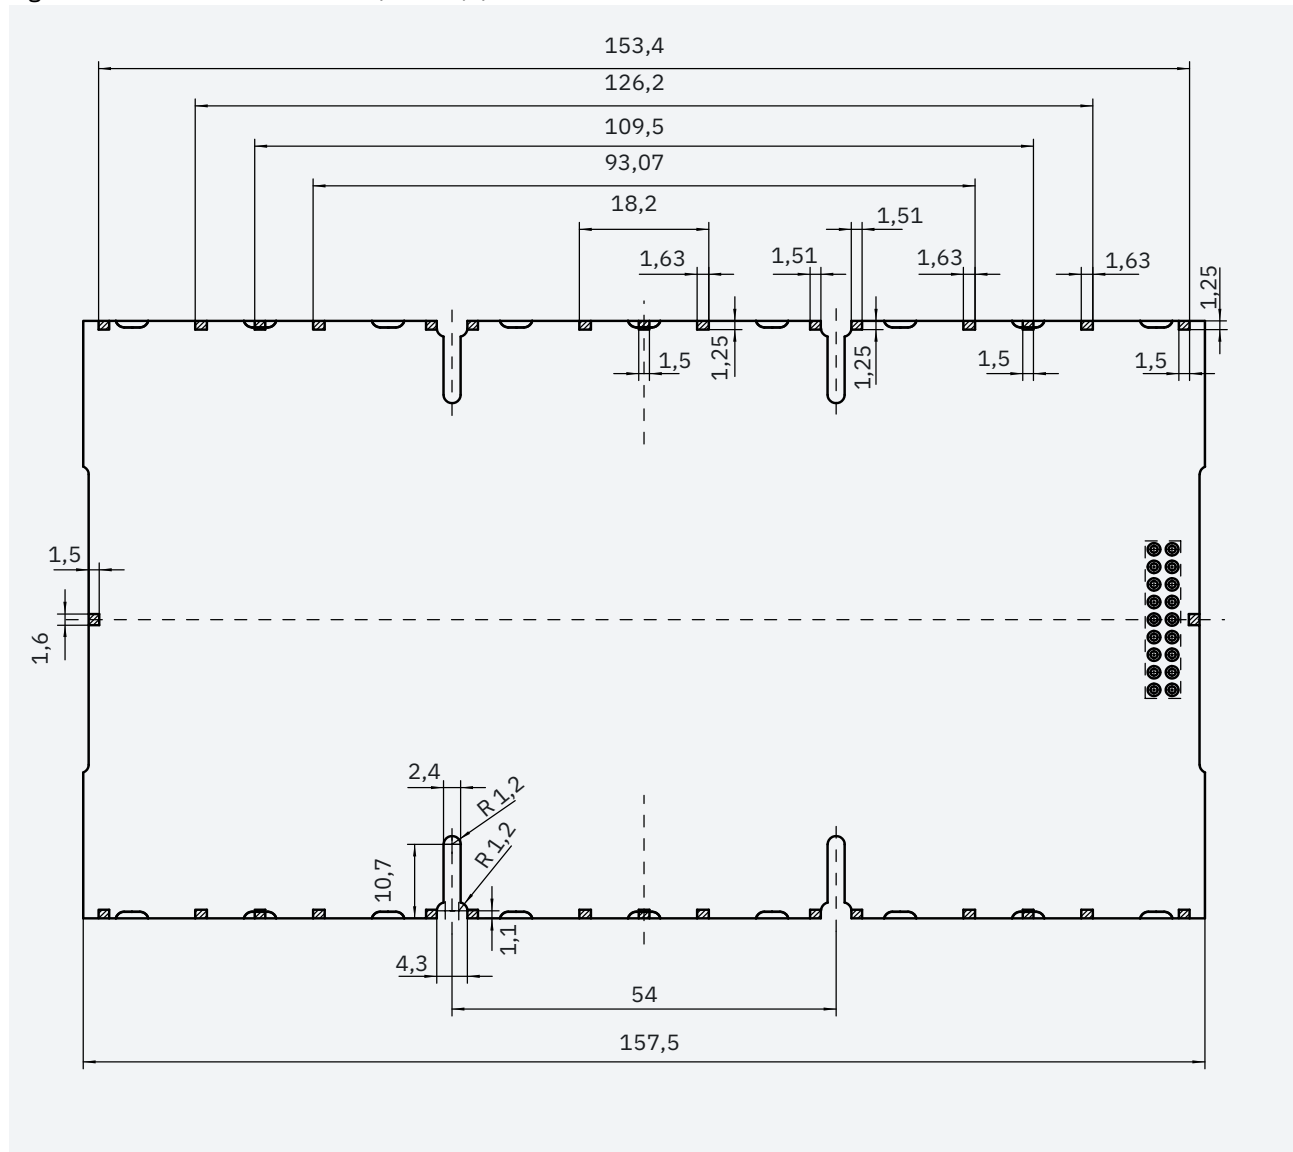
Dimensions of PCB 1 (BC 161,6) – lower side
